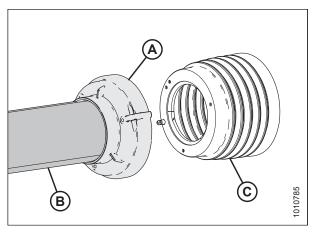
Base Cone and Shield Tube Removed from Outer Cone
